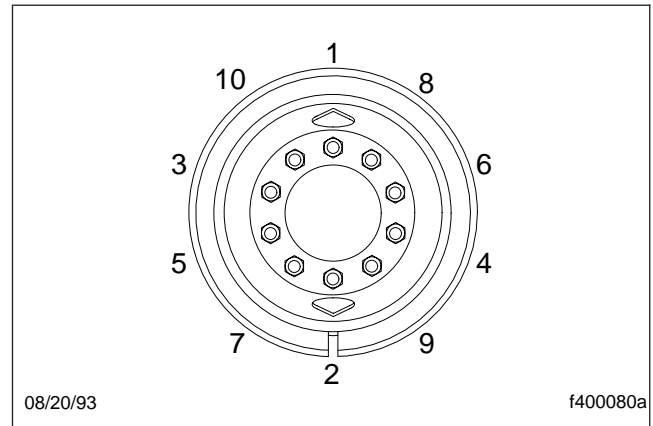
, 10-Hole Disc Wheel Tightening Sequence
